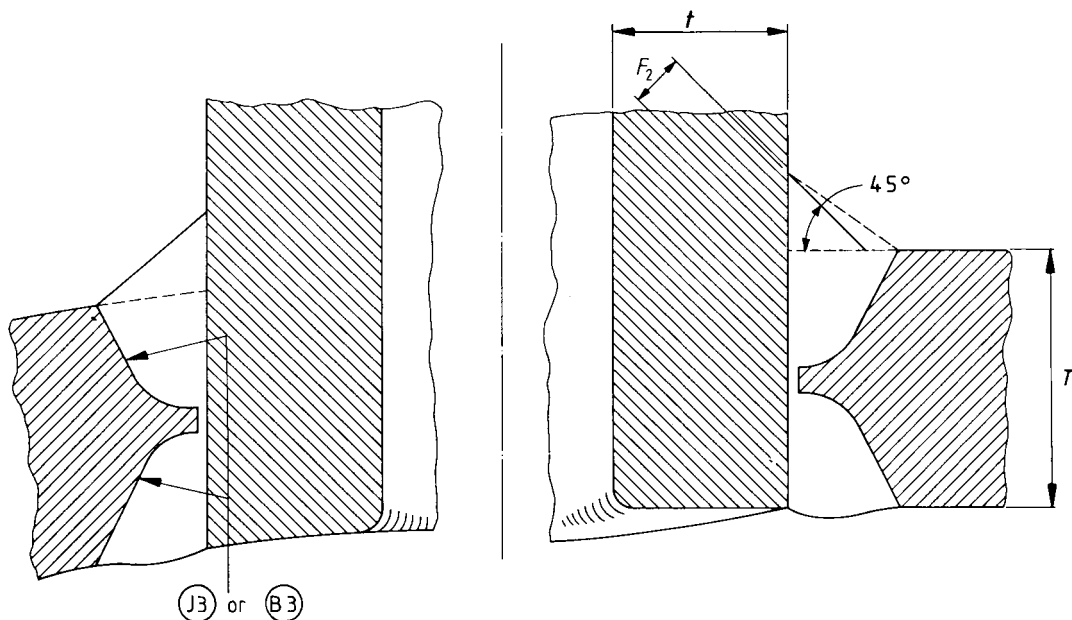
Set-in branches: partial penetration butt-welded connections
